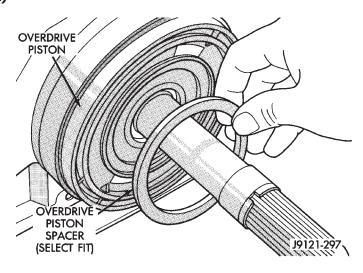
Overdrive Piston Thrust Plate Removal/ Installation
